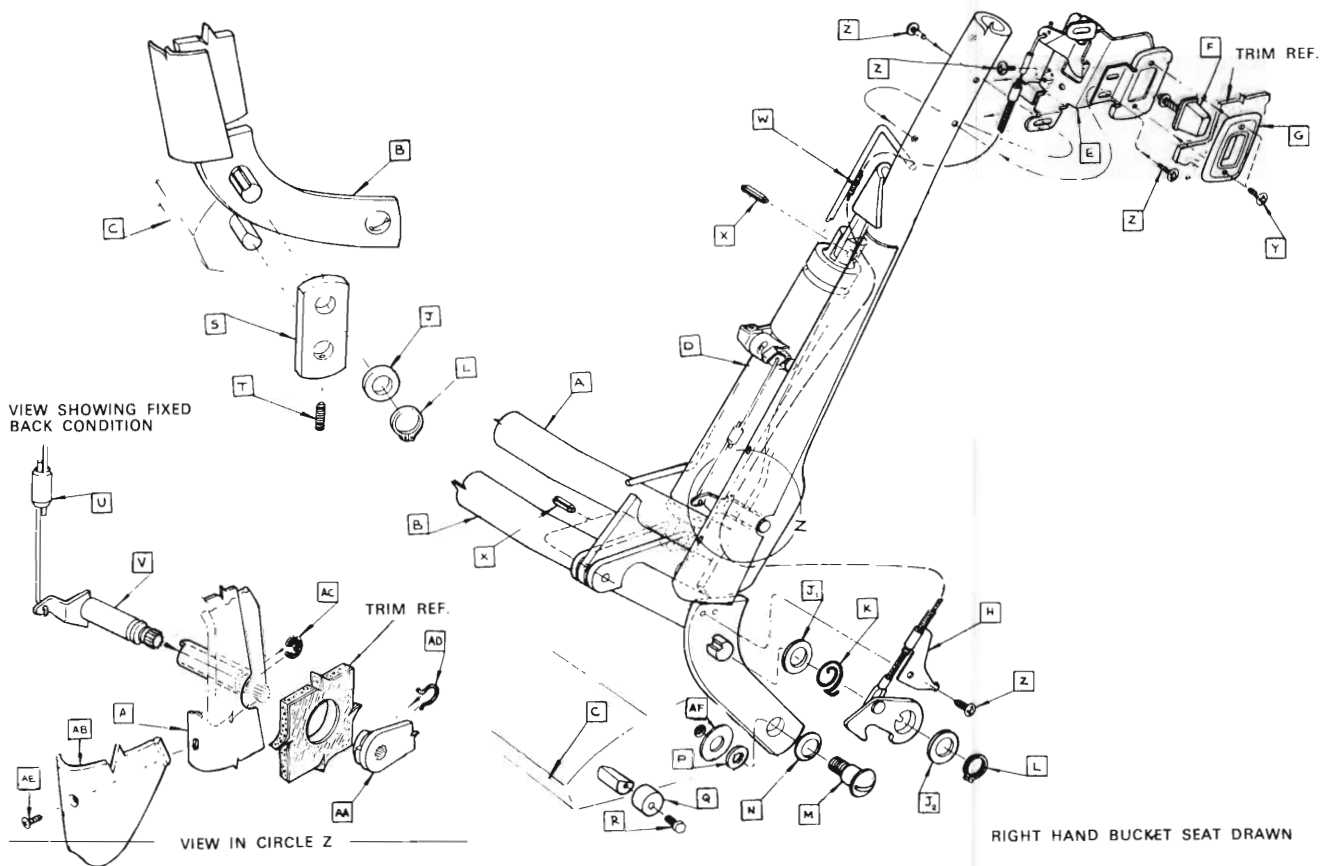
Recliner mechanism and fixed back recliner bucket seats
